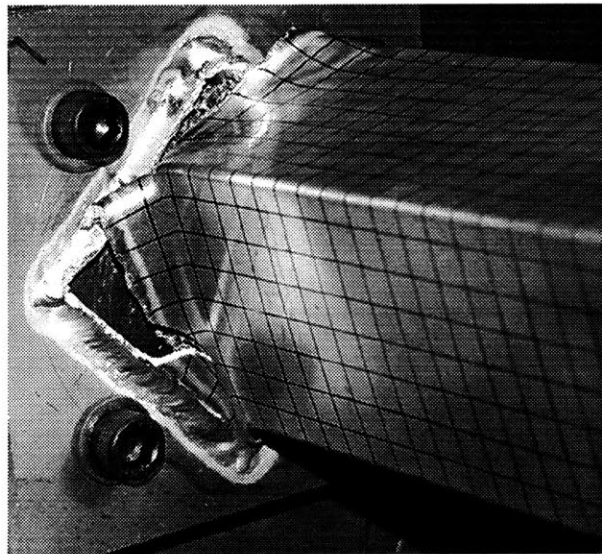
Welding failure of the end fixture of a tube
